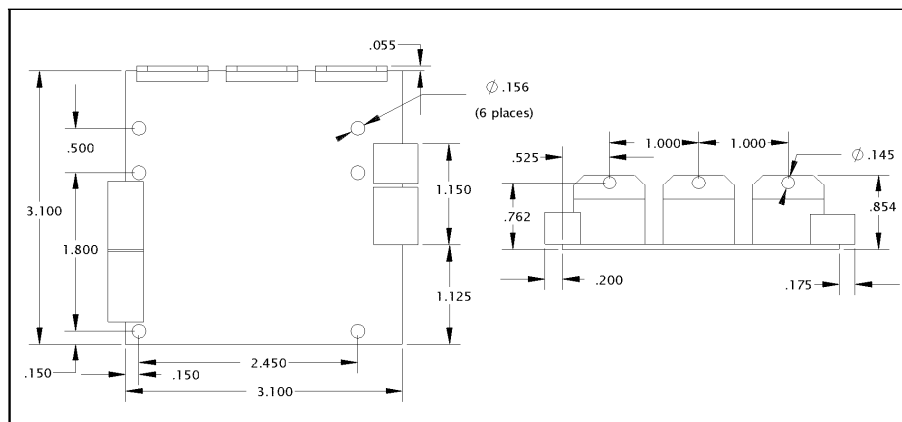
PIC-SERVO 3PH Motor Control Board Dimensions
